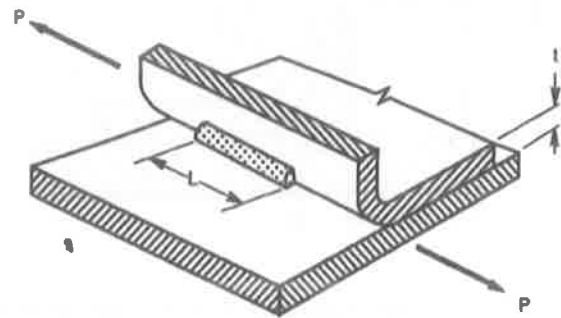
Shear in Flare Bevel Groove Weld
